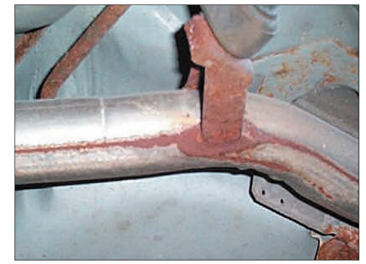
This corrosion hot spot was caused by welding a hanger bracket onto an aluminized exhaust pipe.
